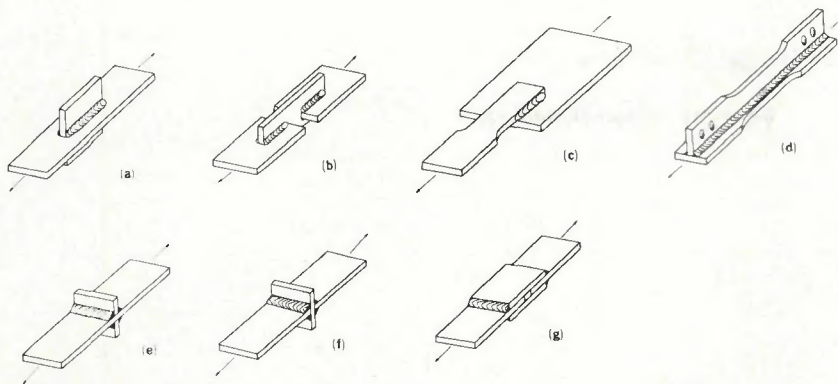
Fillet weld fatigue specimens. (a) non-load-carrying longitudinal fillet welds;⁵³ (b) "egg box" type load-carrying longitudinal fillet weld;⁵² (c) cover-plate-type load-carrying longitudinal fillet weld;^{11, 83} (d) continuous load-carrying fillet weld;^{28, 83} (e) non-load-carrying transverse fillet weld;⁶¹ (f) Tee-type load-carrying transverse fillet weld;^{14, 27} (g) cover-plate-type load-carrying transverse fillet weld^{14, 83}
